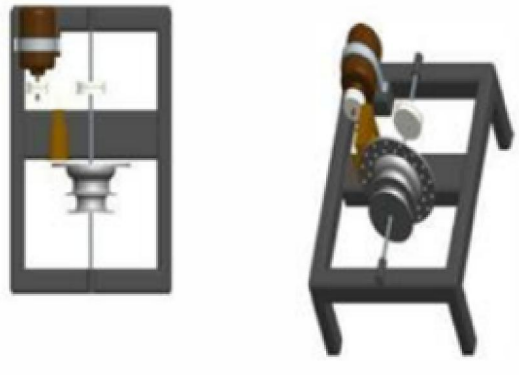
Assembly drawing of Electromagnetic Braking System
